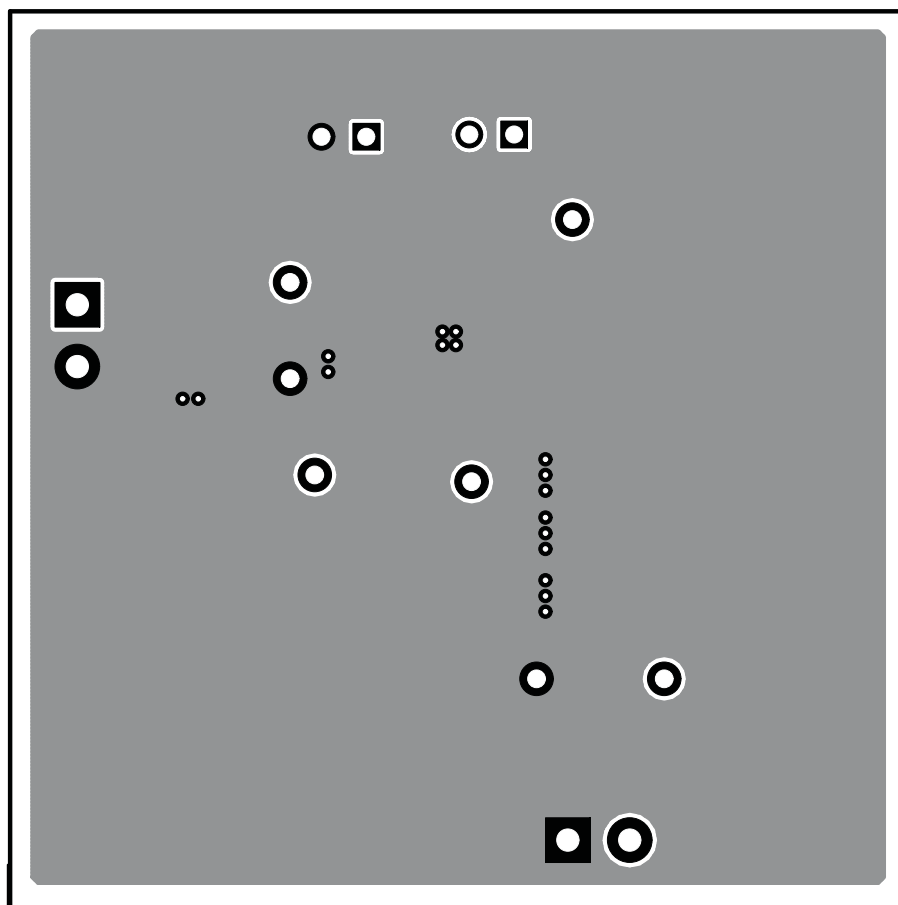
TPS54318EVM-512 Bottom-Side Layout
